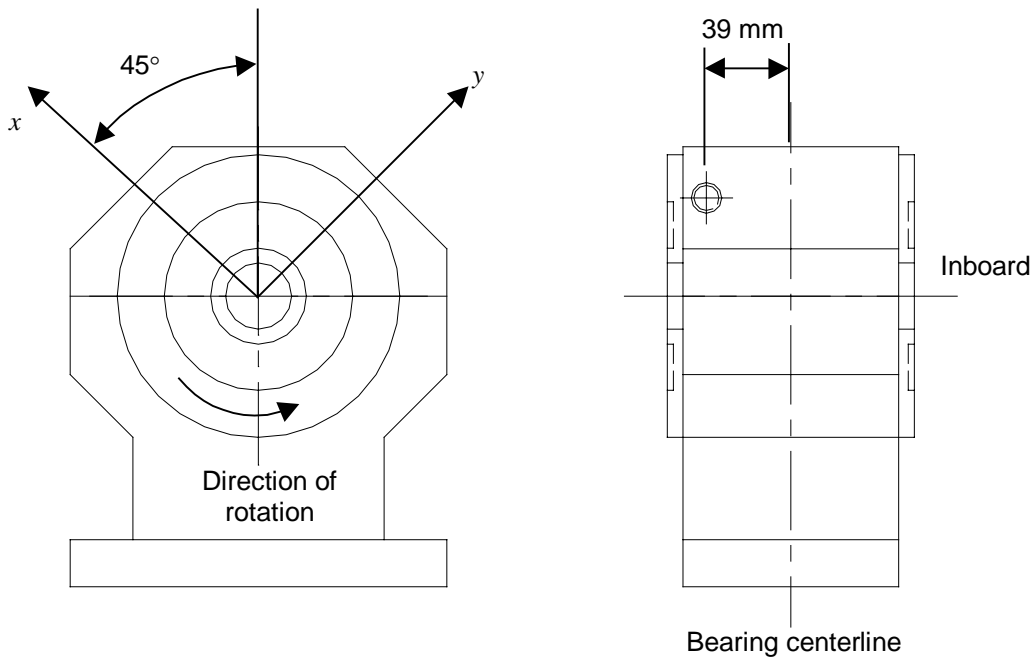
Bearing housing and disposition of eddy-current sensors for measurement of rotor response.
